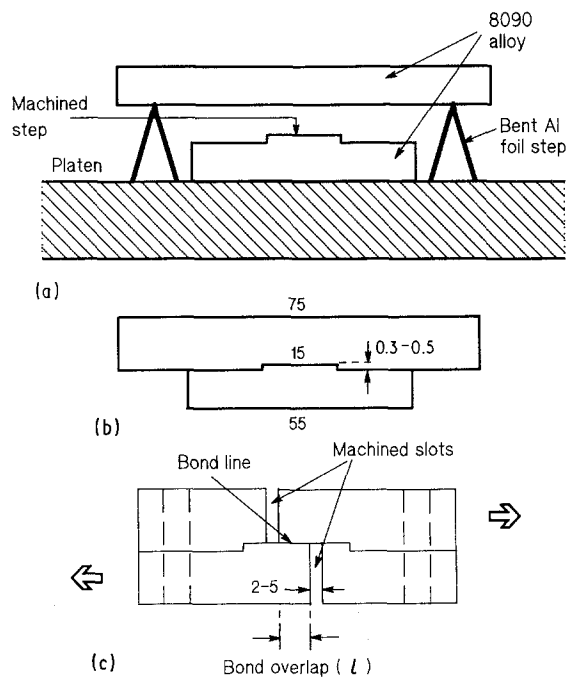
Schematic diagram of shear test piece Type 2, (a) before bonding, (b) after bonding, (c) before testing. Number denote dimensions in mm.
